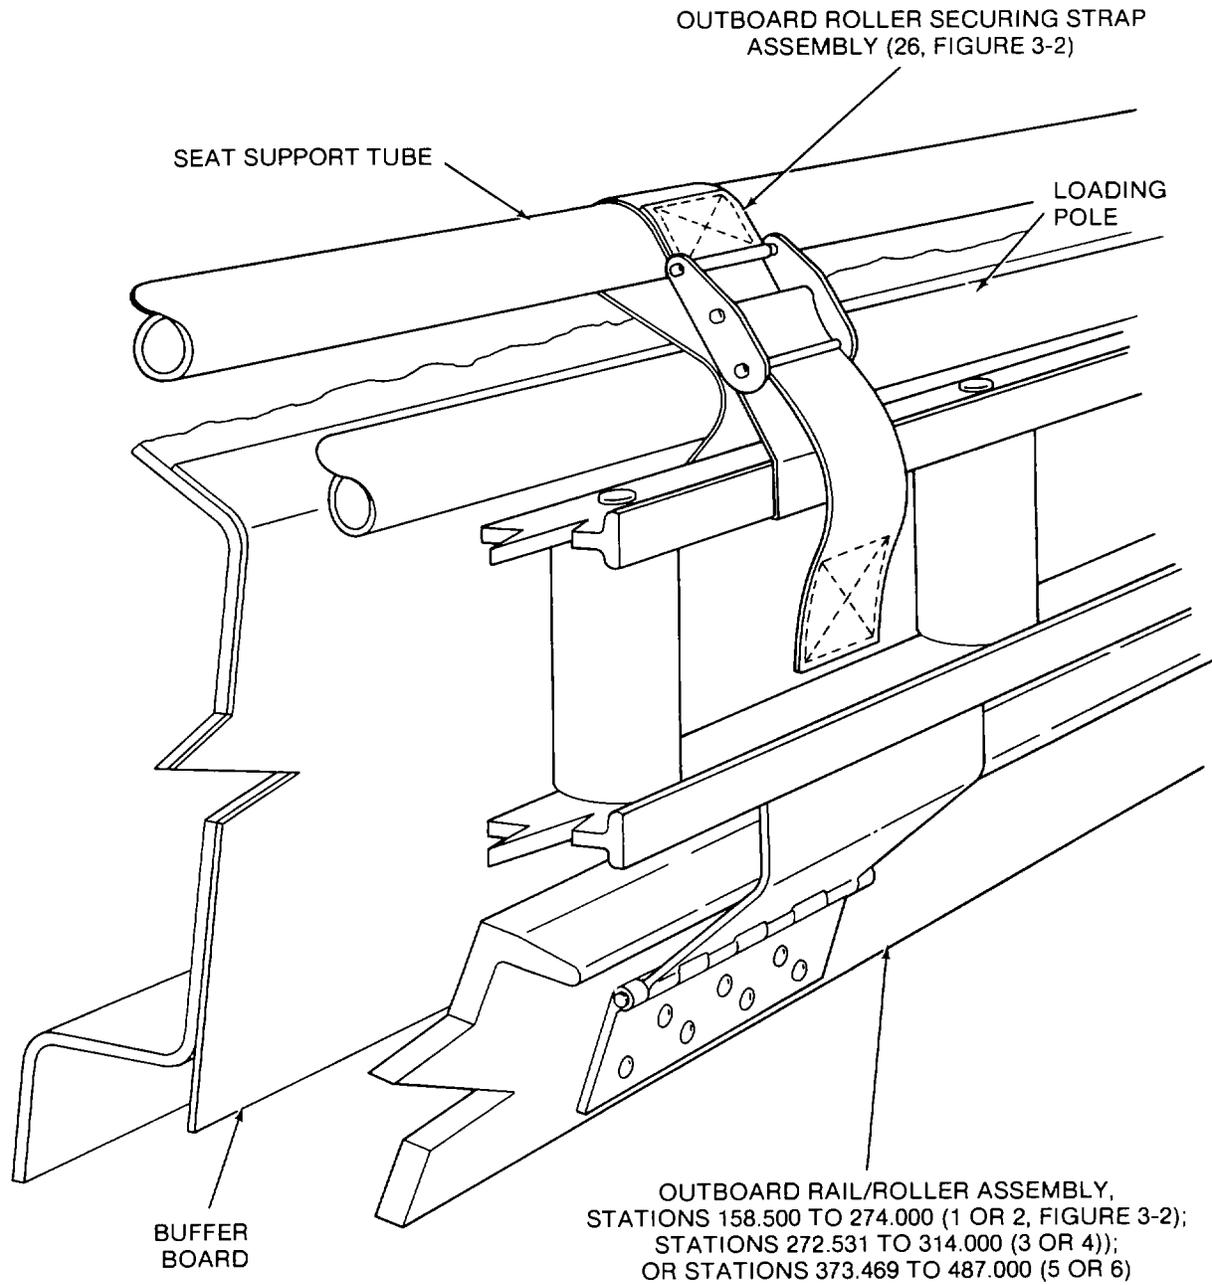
Seat Support Tube Outboard Rail/Roller Assembly Aircraft Loading Pole Stowage
